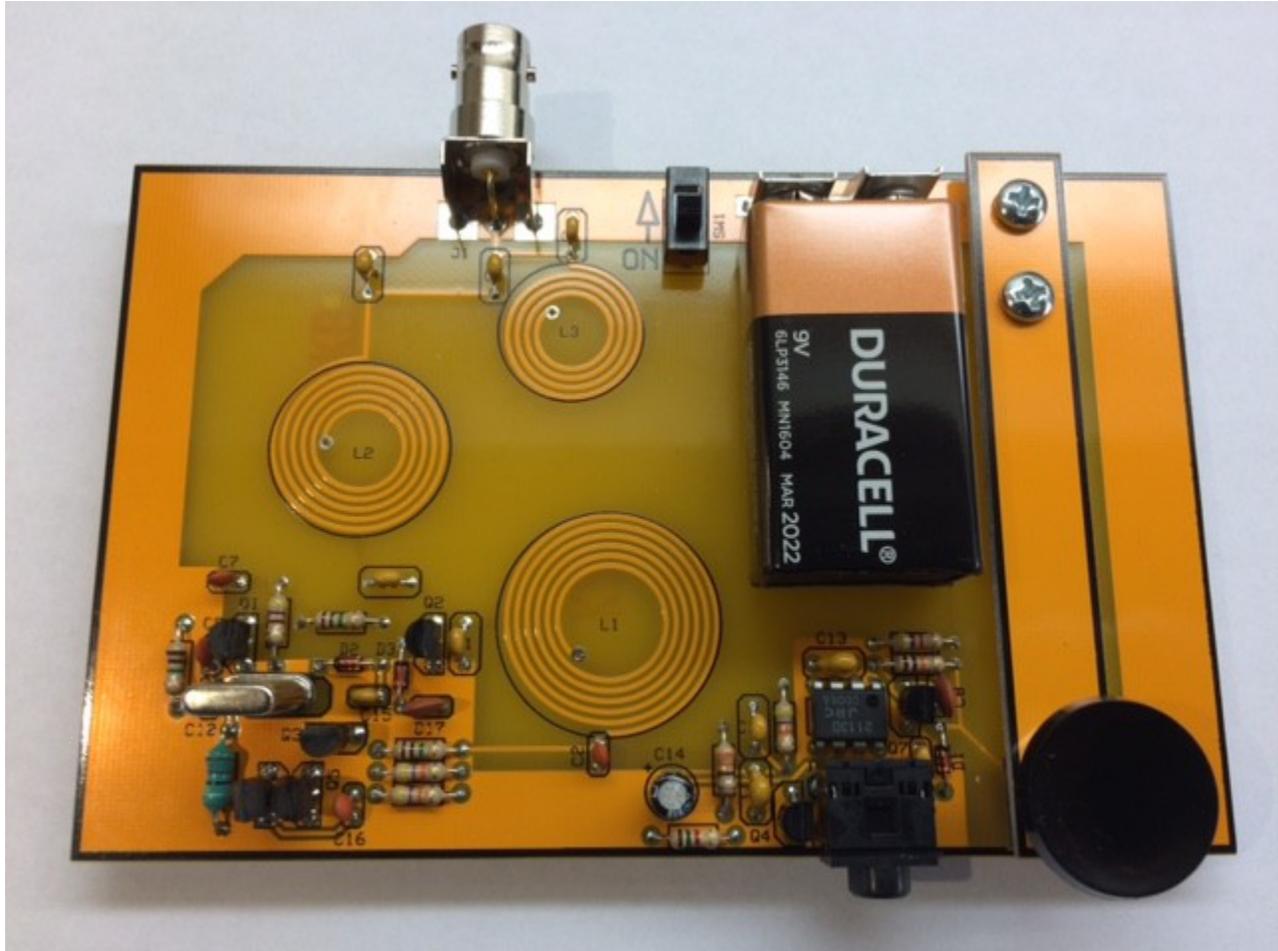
Cricket 30 with Key Strip installed to provide a built-in straight key.
